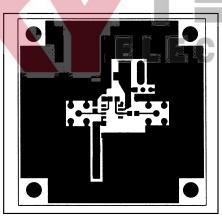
SO-8 High-Speed EV Board Layout—Component Side
